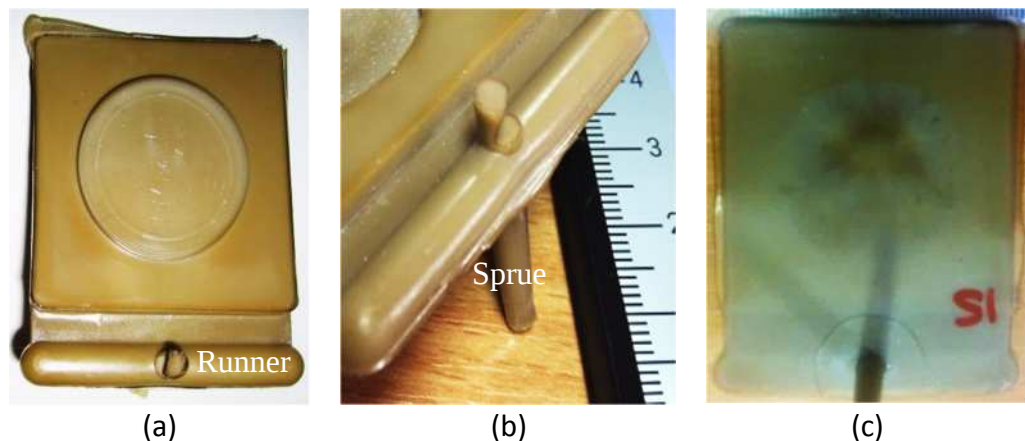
(a) A blank moulding showing the runner, (b) sprue, tab gate and (c) back of the moulding.
